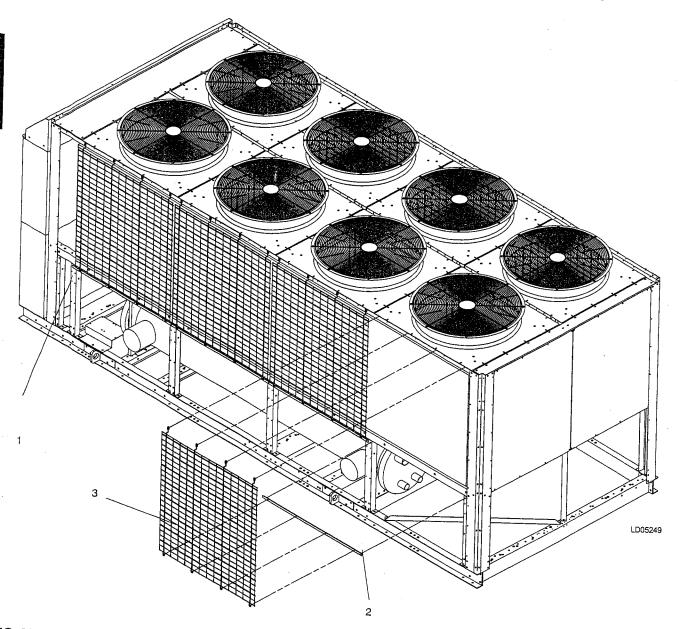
TOP SECTION - WIRE ENCLOSURE - KIT NO. 375-29569-160 IS SHOWN.
